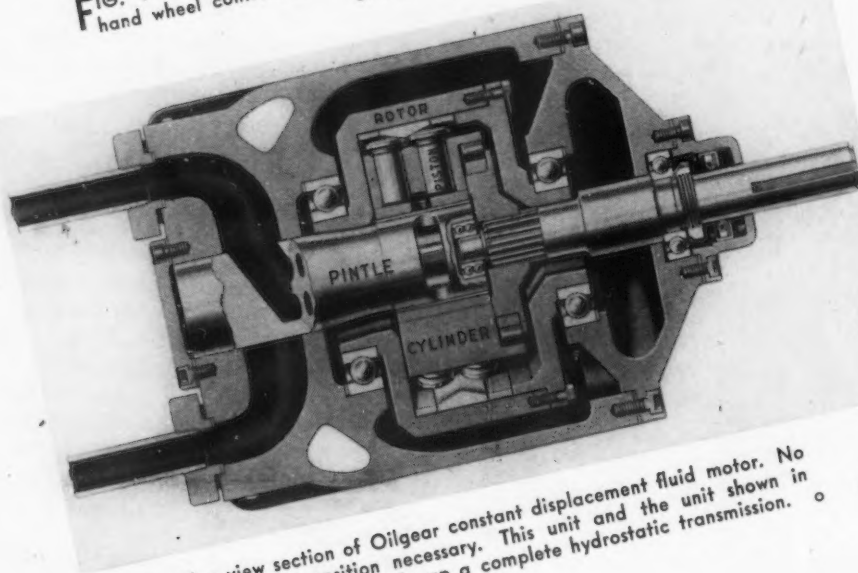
Plan view section of Oilgear constant displacement fluid motor. No adjustment of rotor position necessary. This unit and the unit shown in Fig. 1 when taken together make up a complete hydrostatic transmission.
